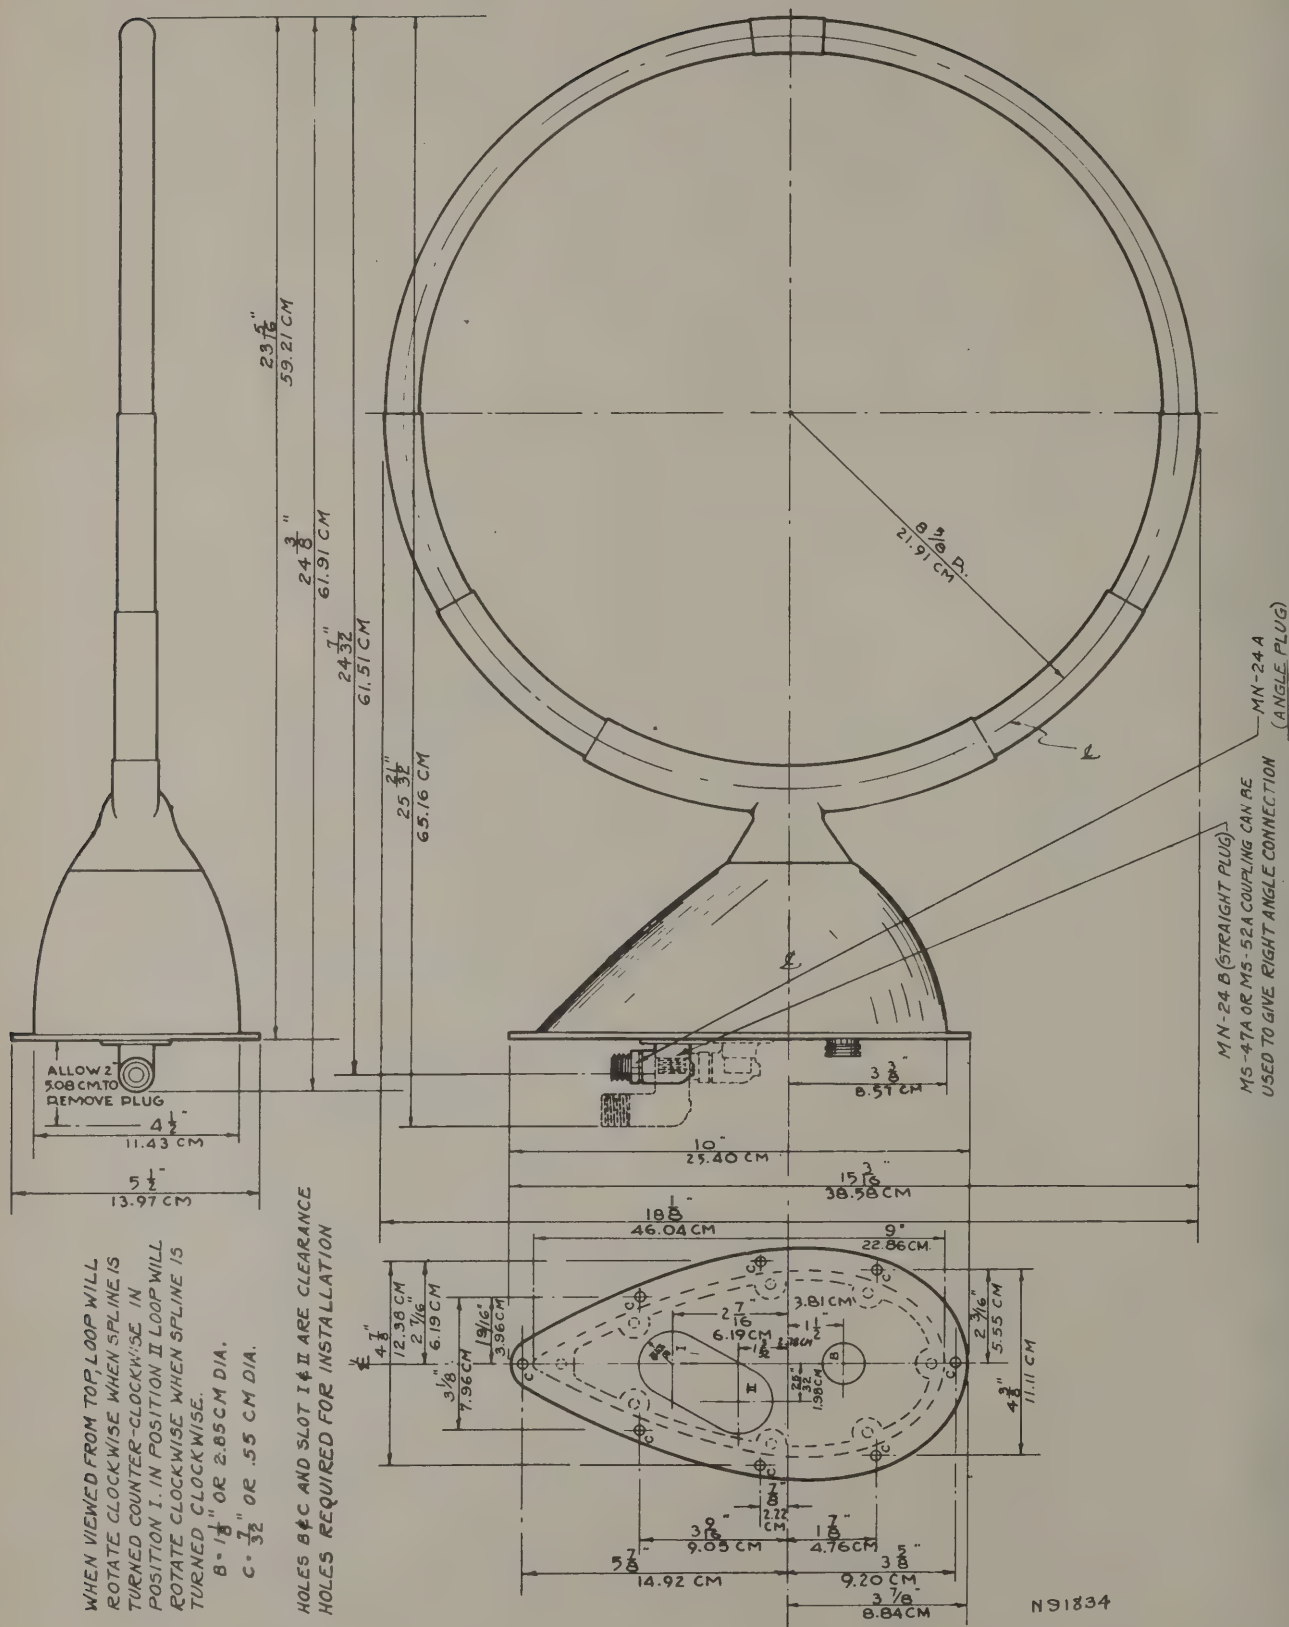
Type MN-24 Rotatable Loop, Outline and Mounting Dimensions
